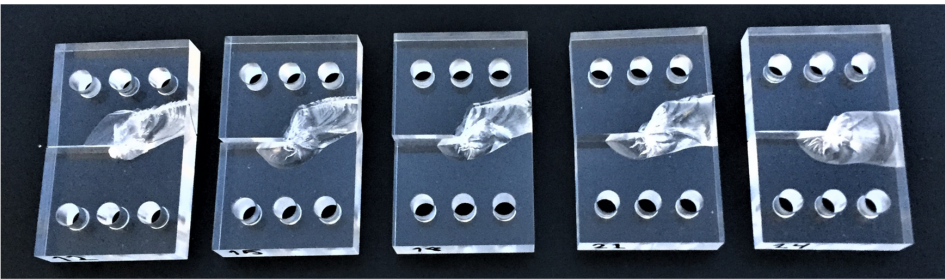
Specimen in plane crack paths for all C-fixture combinations, of J-fixture position  $\beta = 67.5^\circ$ .
